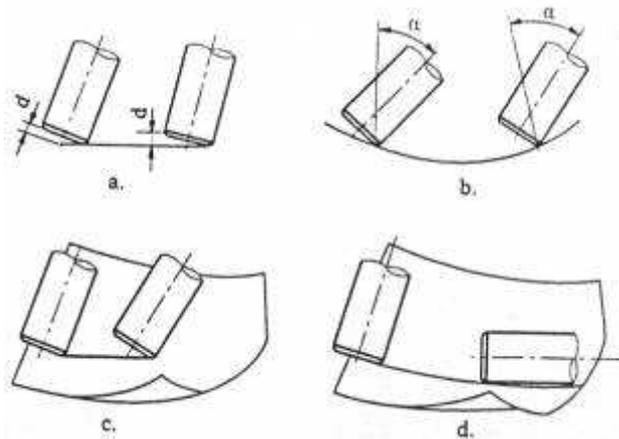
Milling geometry for 5-axes milling with frontal mill: a – constant  $d$  distance; b – constant  $\alpha$  angle; c – maximum tool-part contact; d – NC rolling (flank processing)
